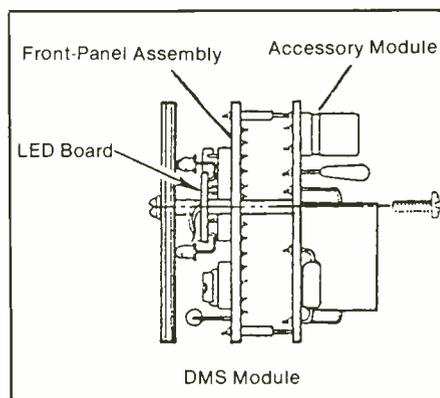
Assembly drawing for DMS/DigiVolt-DC system.
